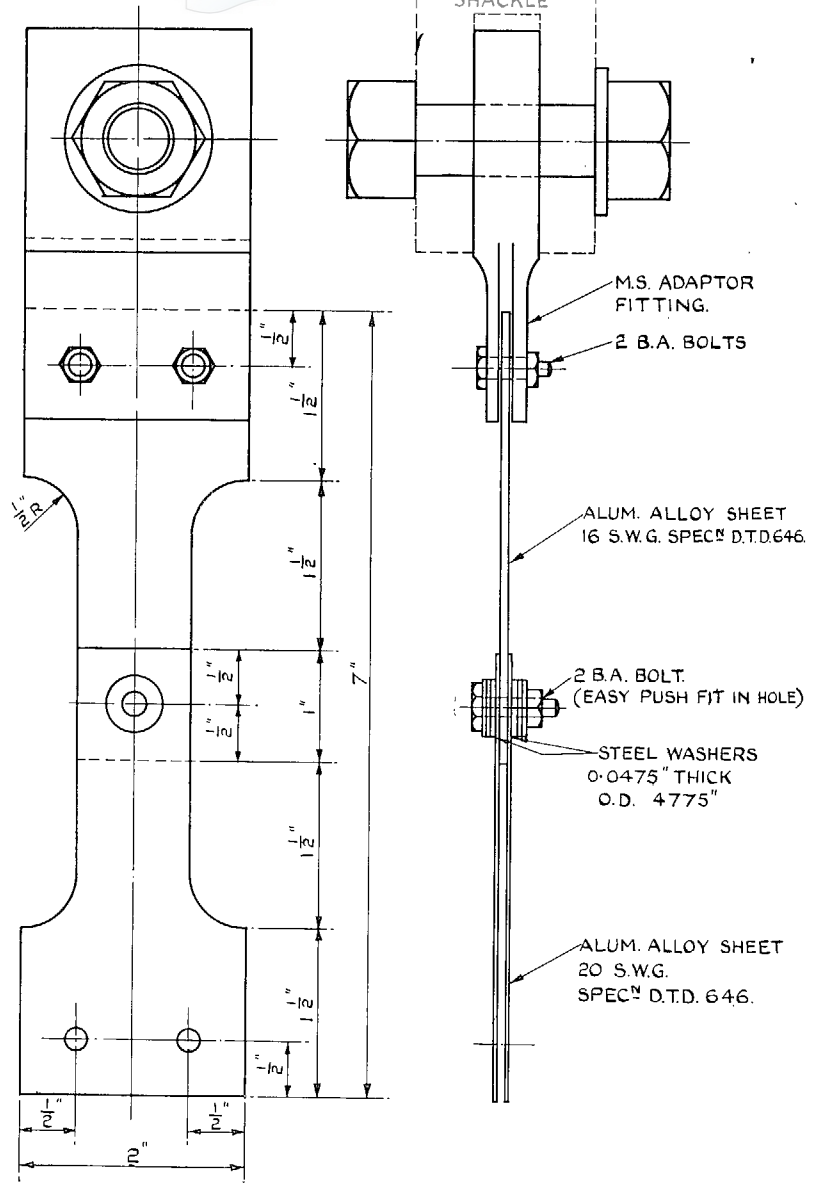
Fatigue-test specimen (single-bolt—double shear).
